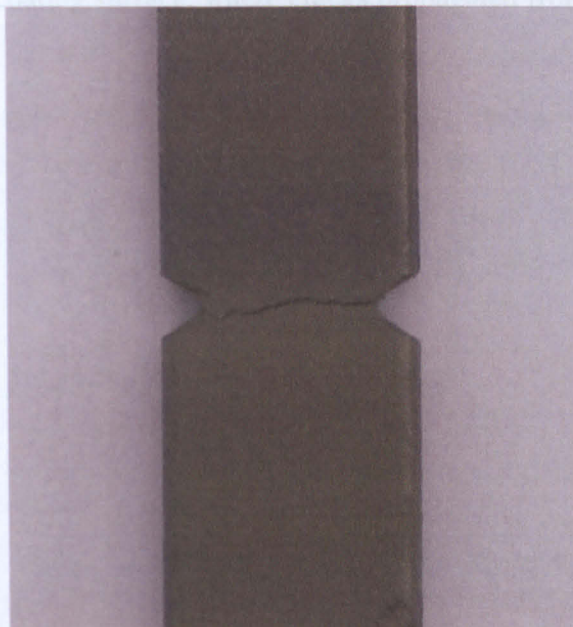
Cracked, dry notched specimen of coating 'A' showing a single crack
